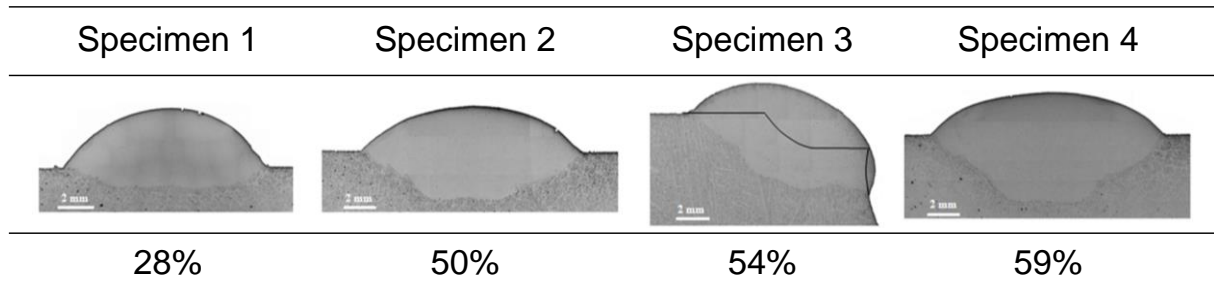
Dilution induced by PTA process using different weldments: specimen 1 - 100 A, specimen 2 and 3 - 128A, specimen 4 – 140 A.
